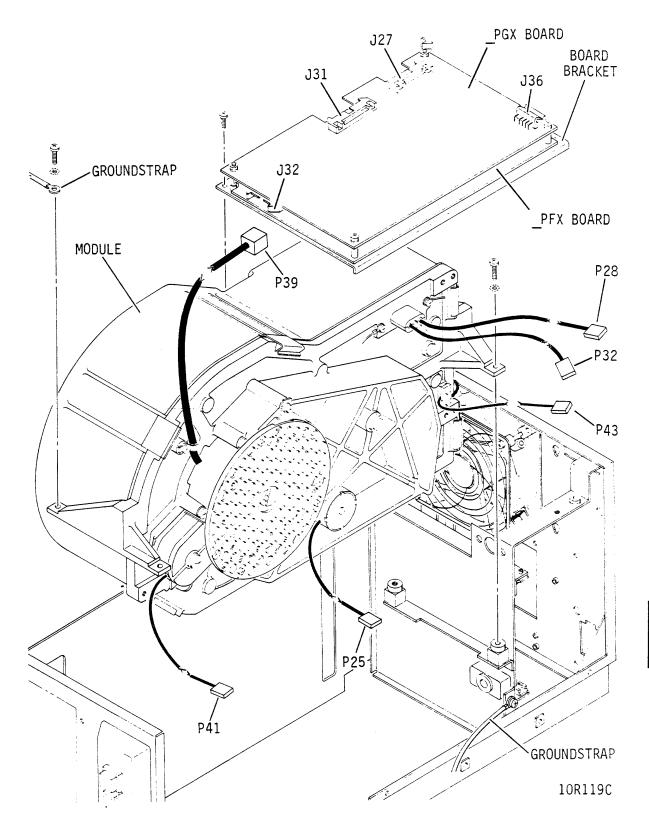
Module Removal and Replacement With Shipping Dampers
